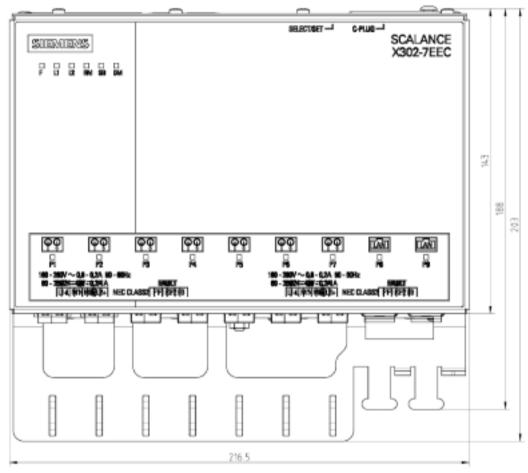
Dimension drawing IE Switch X302-7EEC - view
